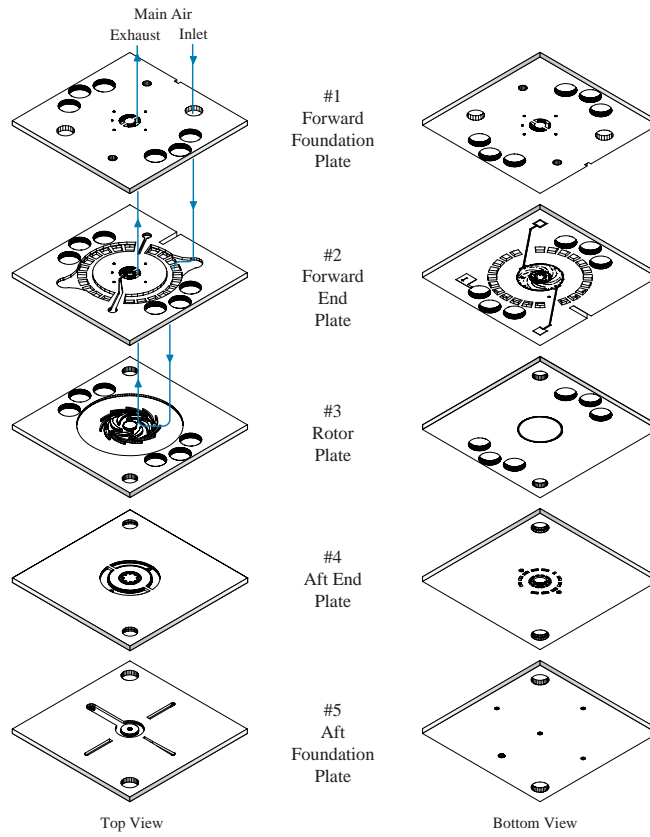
Top and bottom view of the five-stack device. The completed die is 15 mm per side and 2.3 mm thick.
